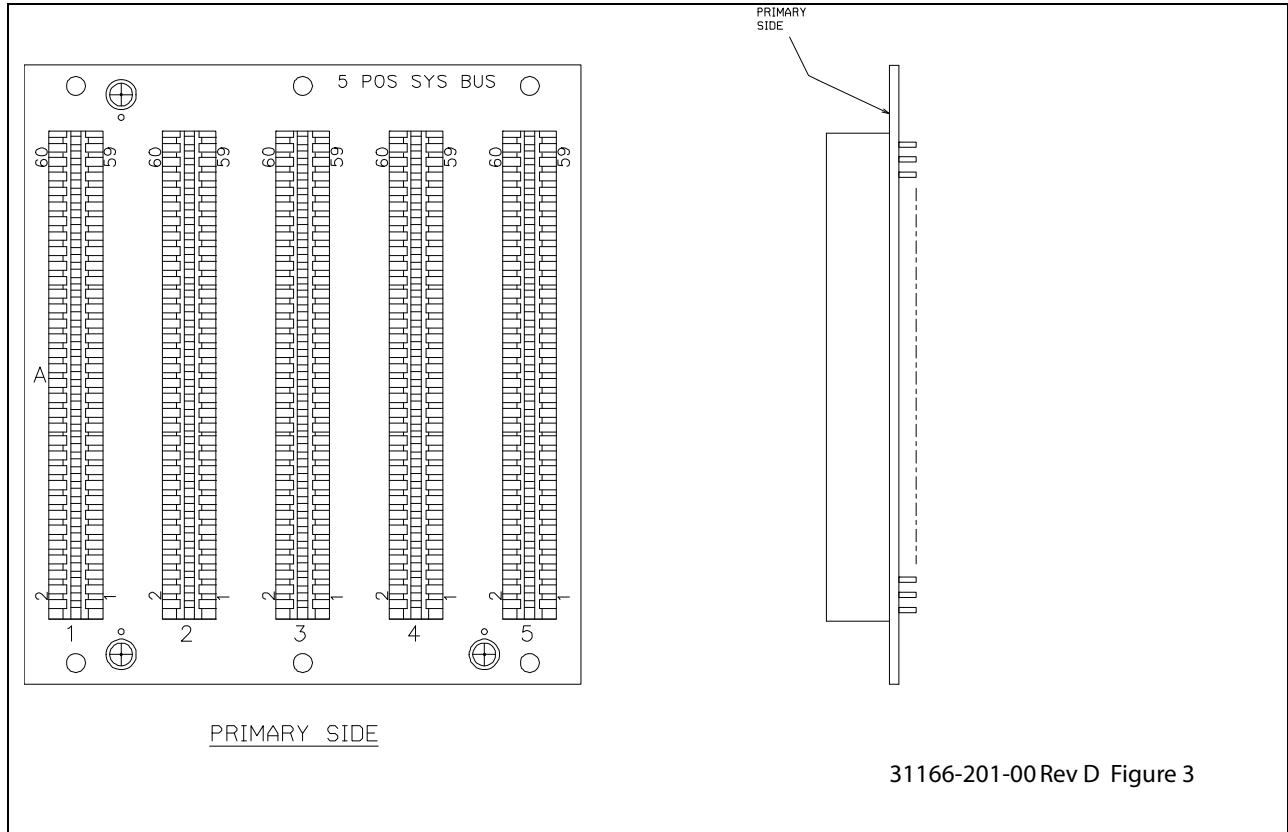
Main Bus Board Assembly, P/N 31166-201-05
